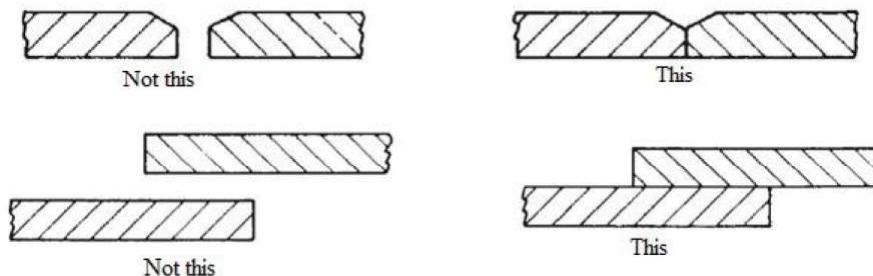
Poor and good fit-up of weld joints.
